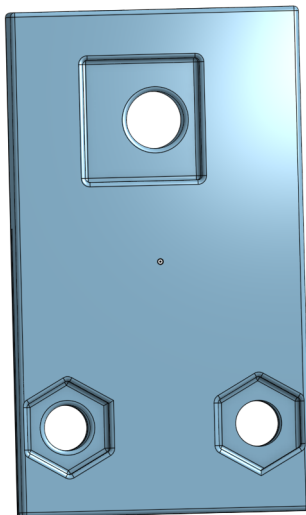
This figure shows the back of the device holder. In the top half the attachment to the force sensor of the linear stage can be seen. In the bottom half the hexagon-shaped gaps are shown. These gaps enable for either the nut or the bolt's head to be submerged to ease tightening of the bolt-nut configuration. This figure was created using Onshape (Onshape Inc., Massachusetts, USA)
